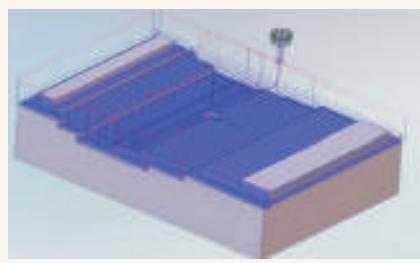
Strategy for cutting process using the 5-axis cutting machine MotionMaster TB 105.
